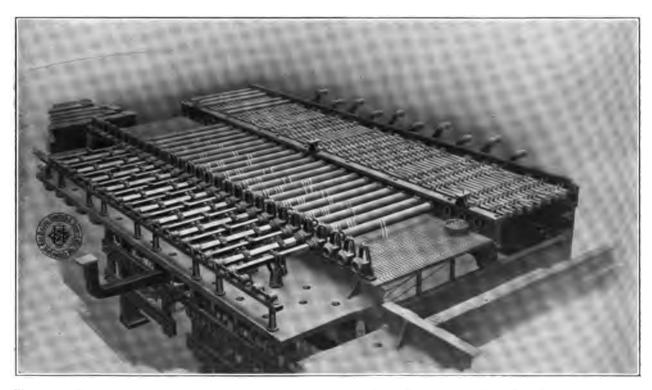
Electro-Pneumatic Interlocking Machine; View from Rear Showing Locking, Combination Plate and Indication Segments.
